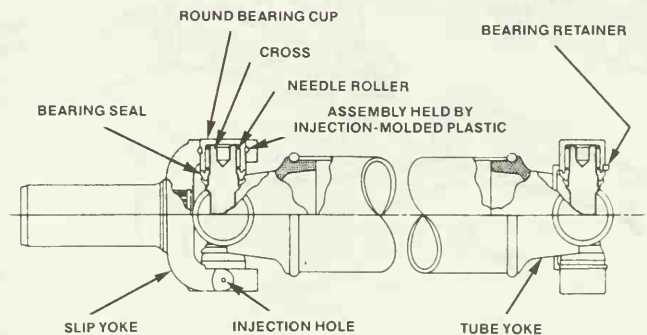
A universal-joint bearing assembly retained by an injection-molded plastic ring. (Chevrolet Motor Division of General Motors Corporation)
